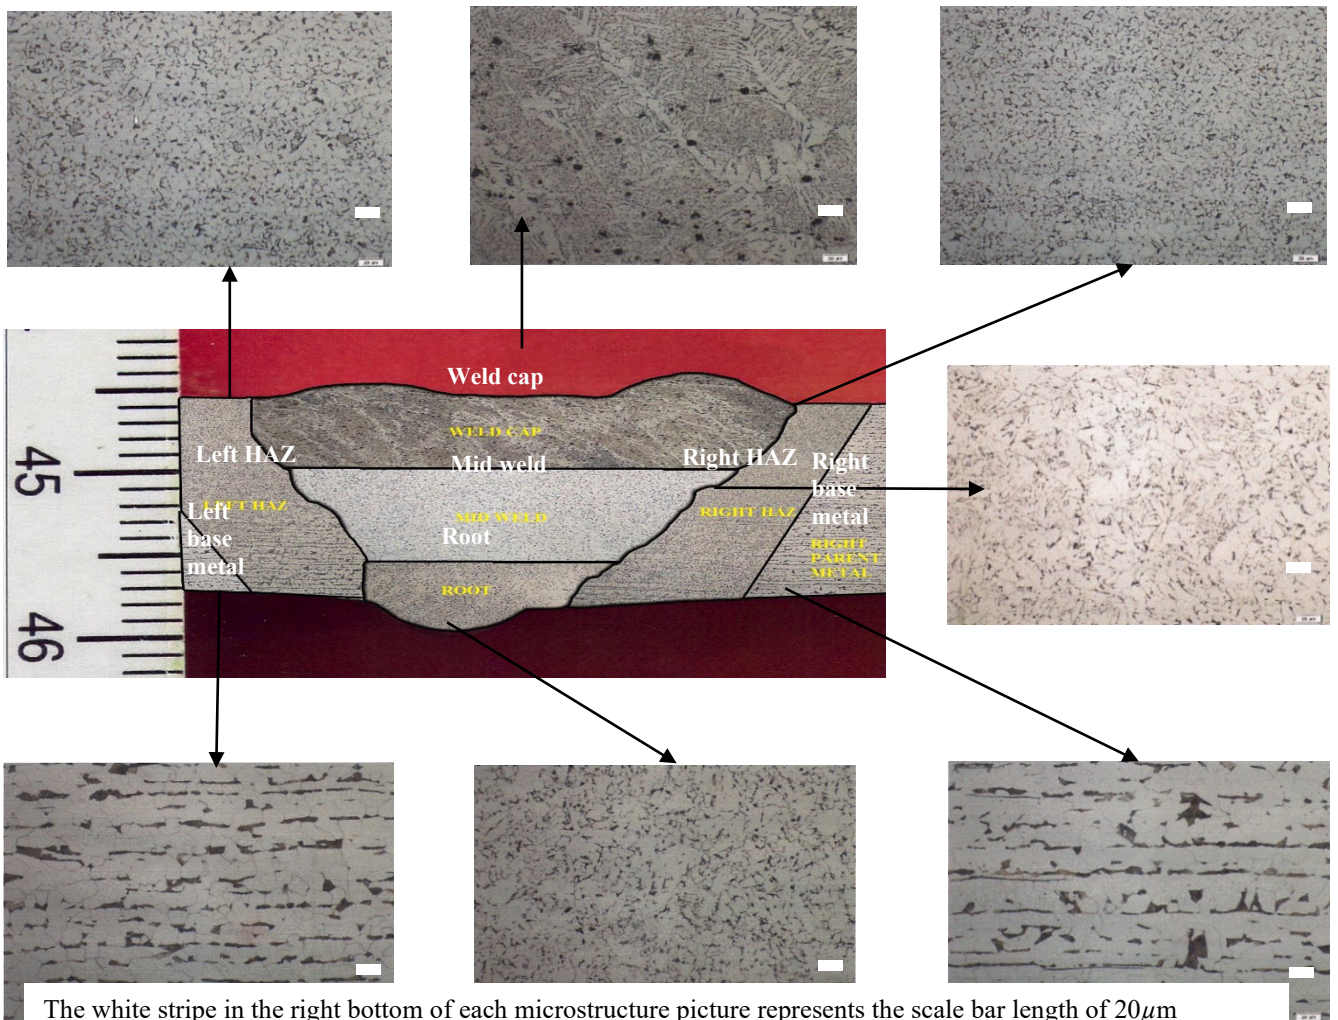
The macro-photograph of the test coupon welded with 70 A with magnification of 10 ×
